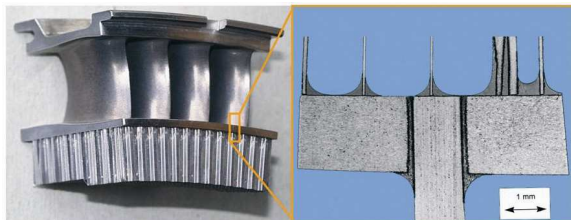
Vane segment with laser cut shrouds (left) and transverse section through the high-temperature brazed airfoil with honeycomb seal (right).
